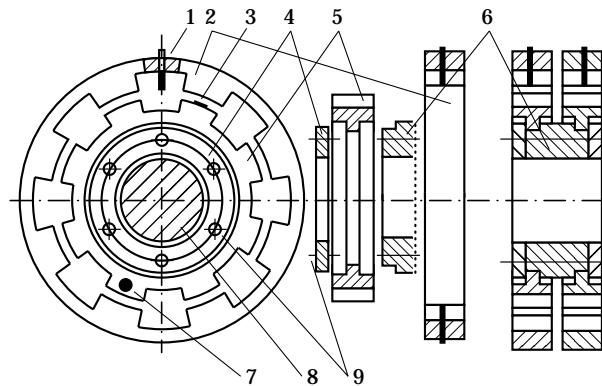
Design of the balancing regulator. 1: sensor for detecting the position of mass; 2: stator; 3: reflection film; 4: press board; 5: slide plate; 6: slide plate seat; 7: correction mass; 8: balanced shaft; 9: screw and spring.
